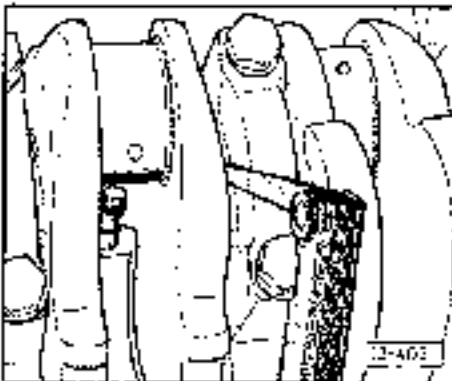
Crankshaft - Reinstalling 20 crankshaft
